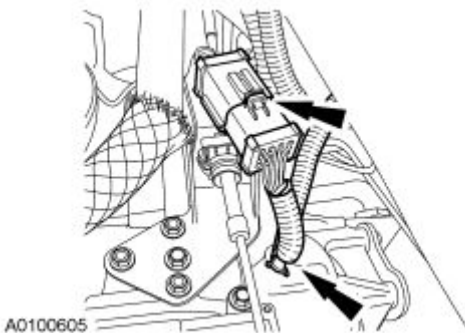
Locating 16-Pin Electrical Connector & Wiring Retainer
